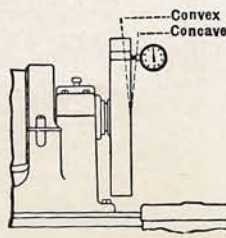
Testing Squareness of Saddle Cross Slide by Machining the Face Plate and Testing with Indicator
